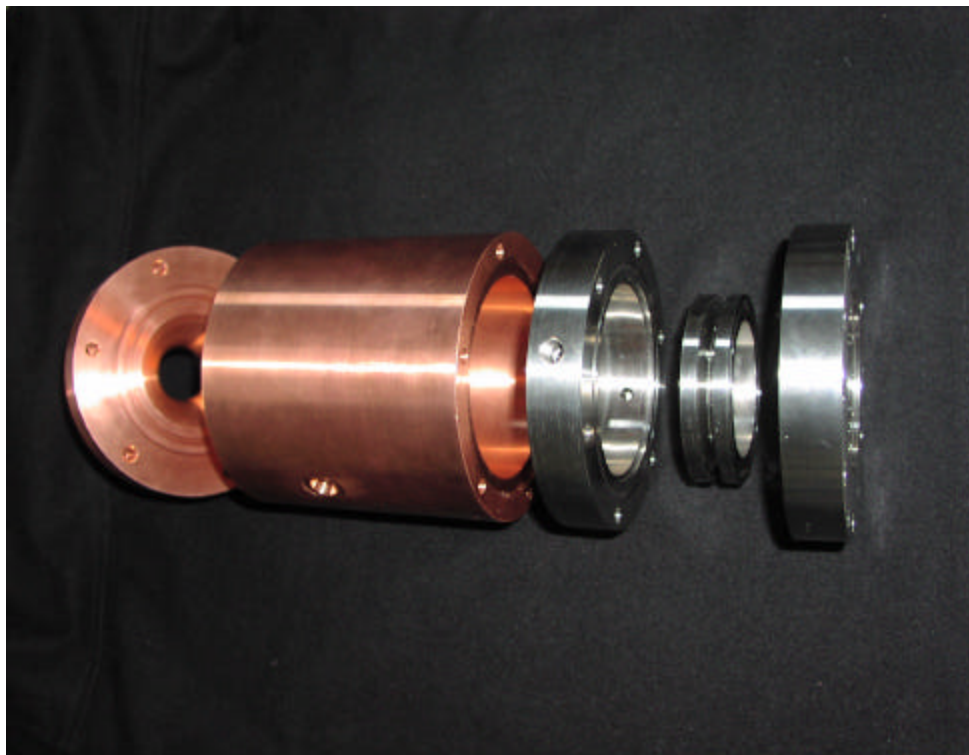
Assembly of injector and pre-combustor with a test nozzle.
